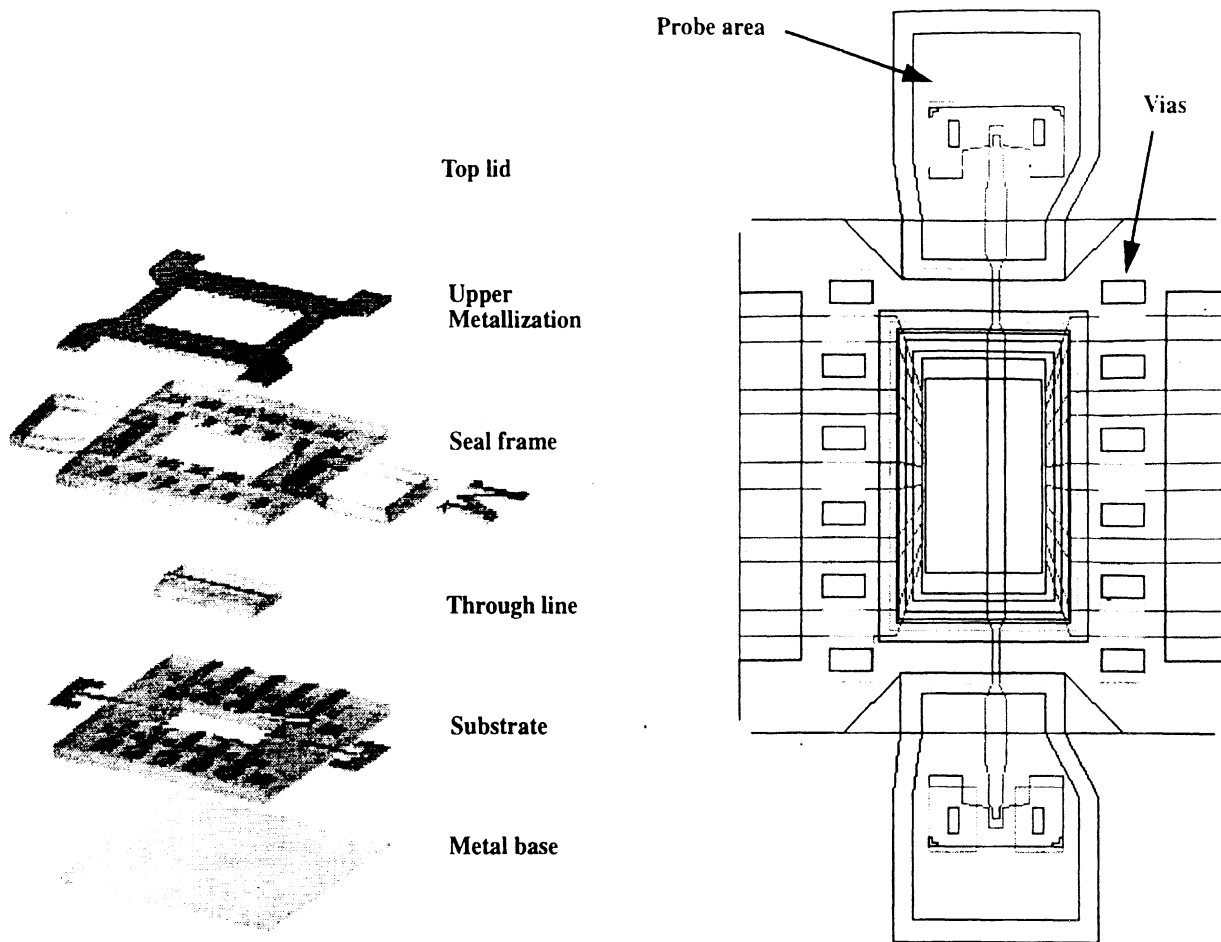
3-D view of package layers and actual CAD drawing with all layers superimposed.
